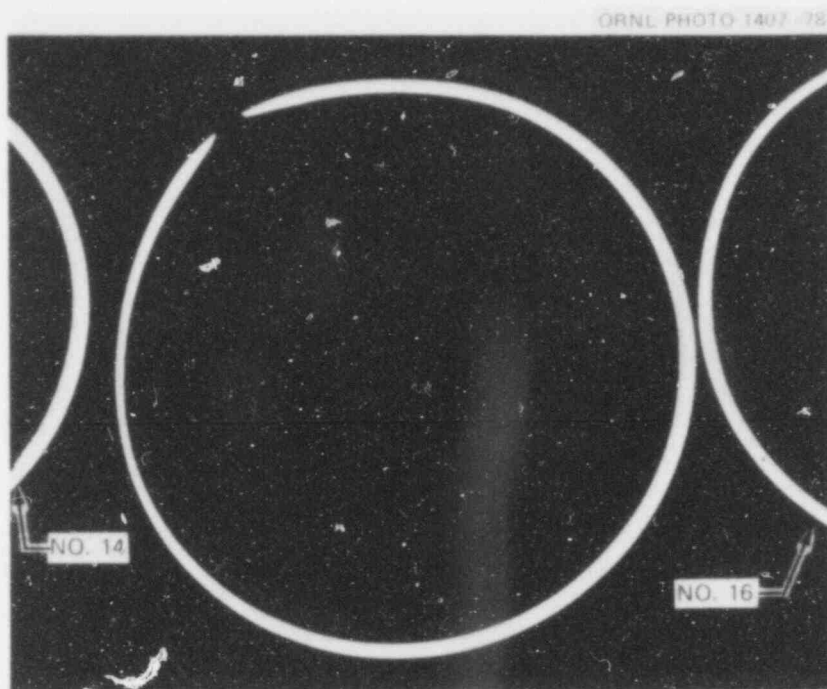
Enlarged view of tube No. 15 at 20.1-cm elevation showing pinhole burst.
